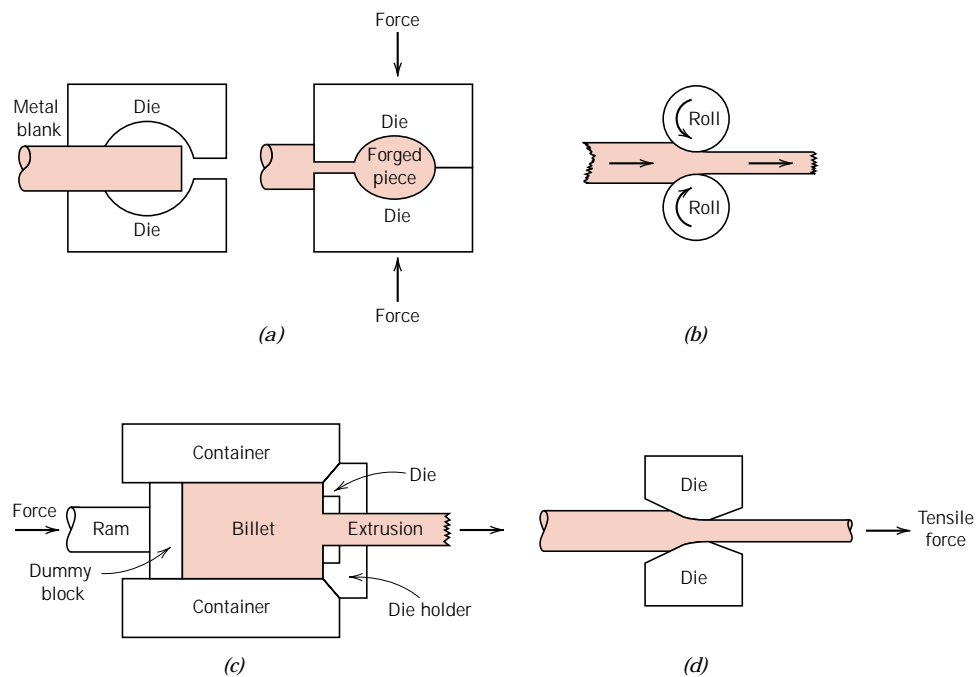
Metal deformation during (a) forging, (b) rolling, (c) extrusion, and (d) drawing.
